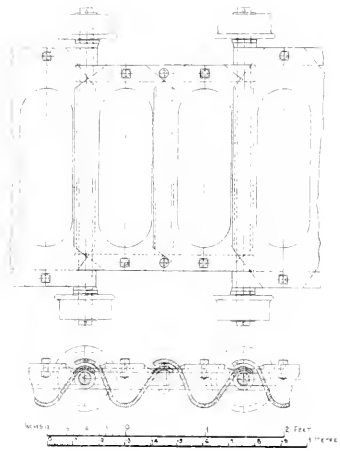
CHILLS AND CHAINS FOR PIG-CASTING MACHINE.
